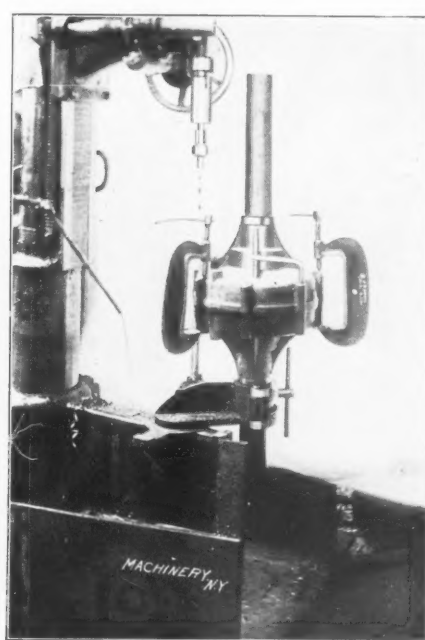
Drilling Bolt Holes in the Differential Gear Case
